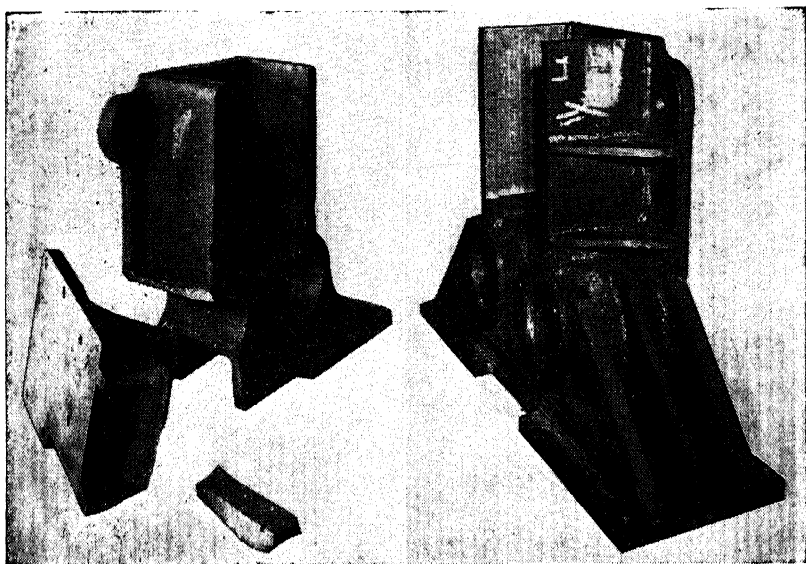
Broken housing for idler rolls weighing 1540 lbs. Replaced with welded steel design shown at right, weighing 640 lbs. Saved 60% over replacement cost.
